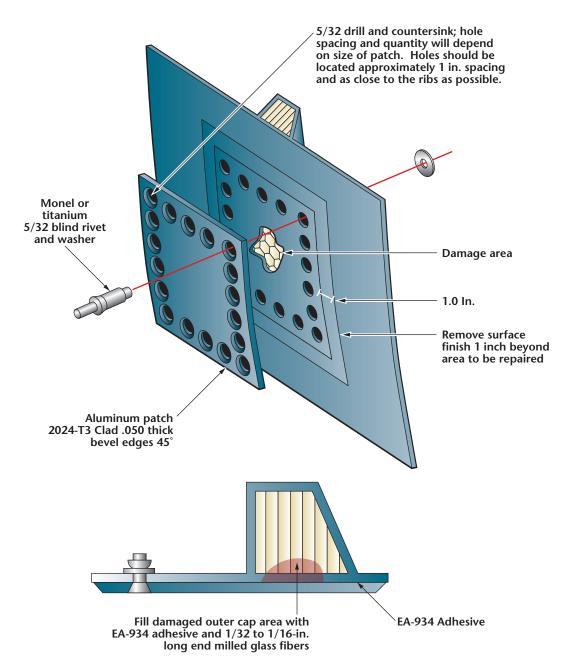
An aluminum patch installed, bonded, and fastened to the surface with a composite stiffener on the inside of the structure.
